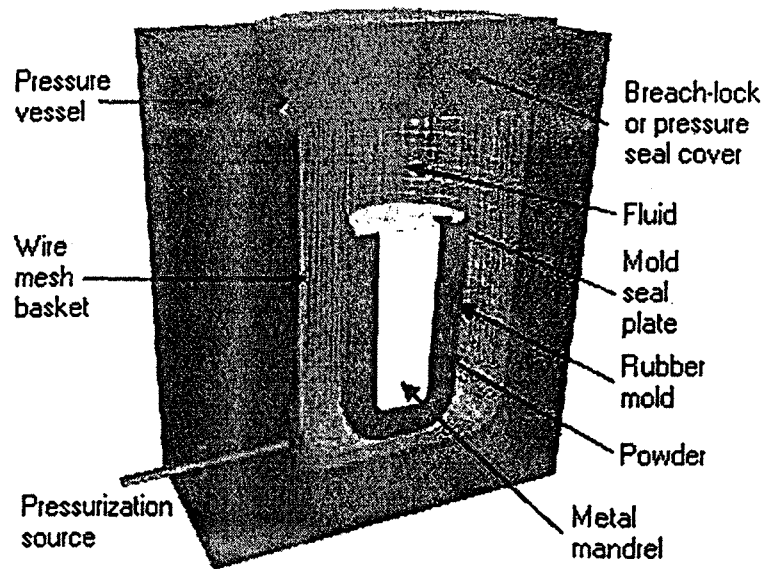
Wet Bag Cold Isostatic Pressing Unit
